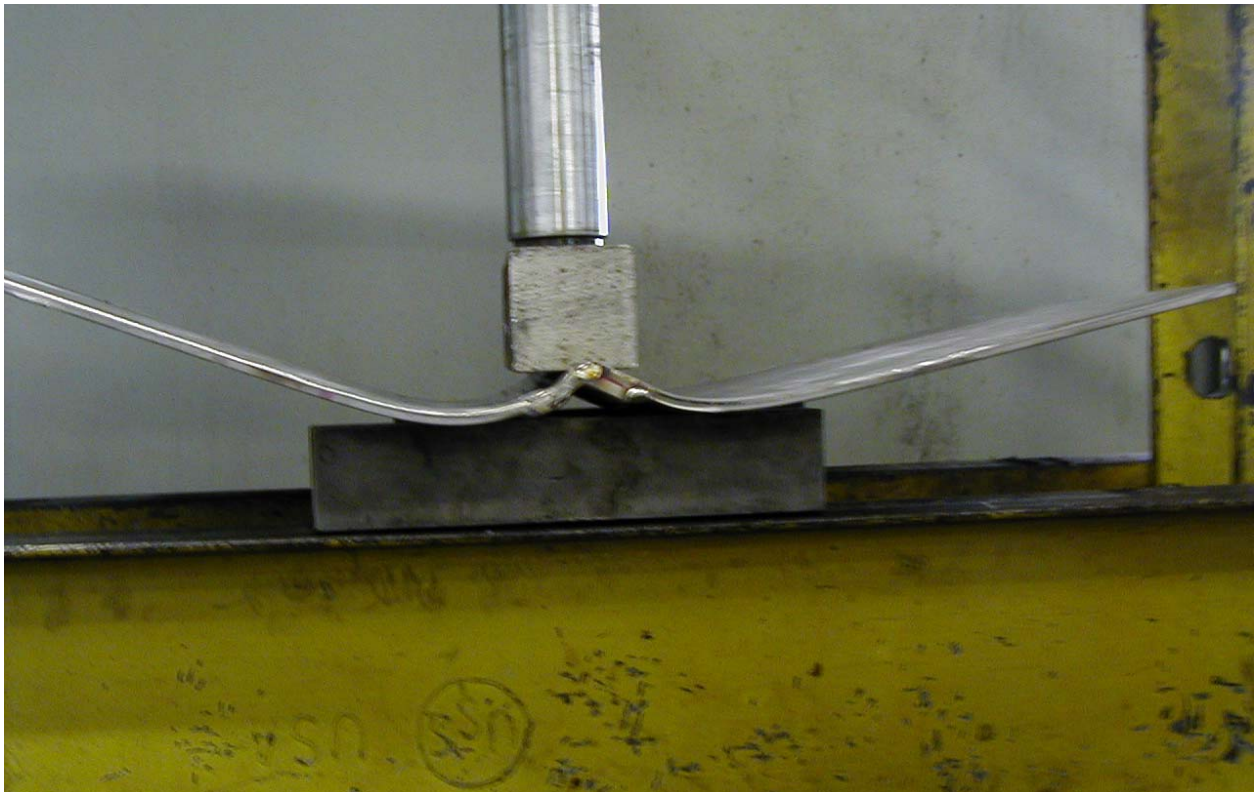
TS-1 Fully Deformed
